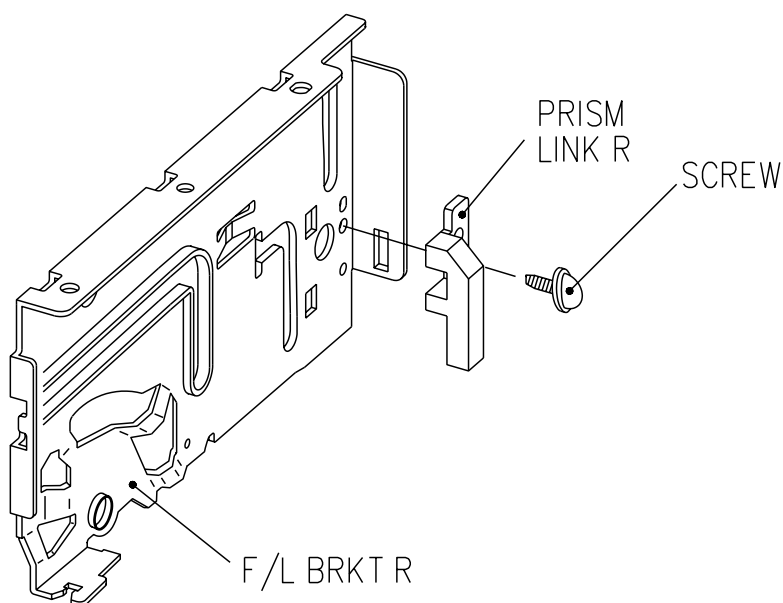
DISASSEMBLY OF THE F/L BRKT R
